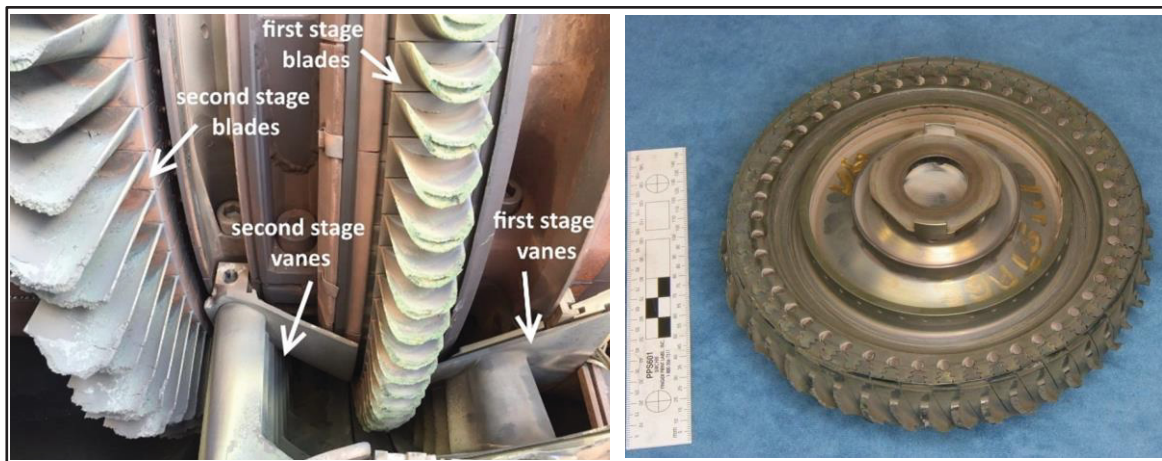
Fractured turbine blades (left), PT Disc with fractured blades (right)
